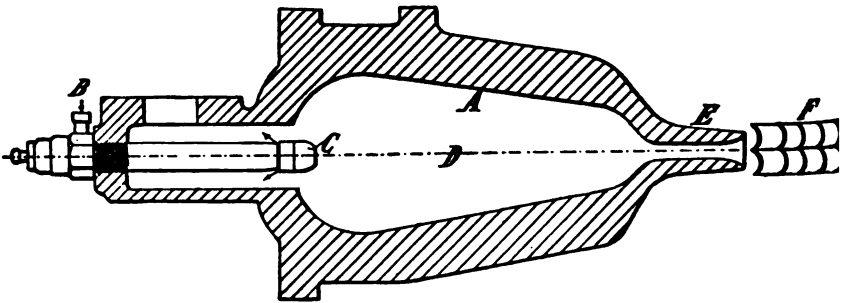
Combustion gas turbine. A, combustion chamber. B, fuel inlet. C, fuel sprayer. E, expansion nozzle. F, turbine.
